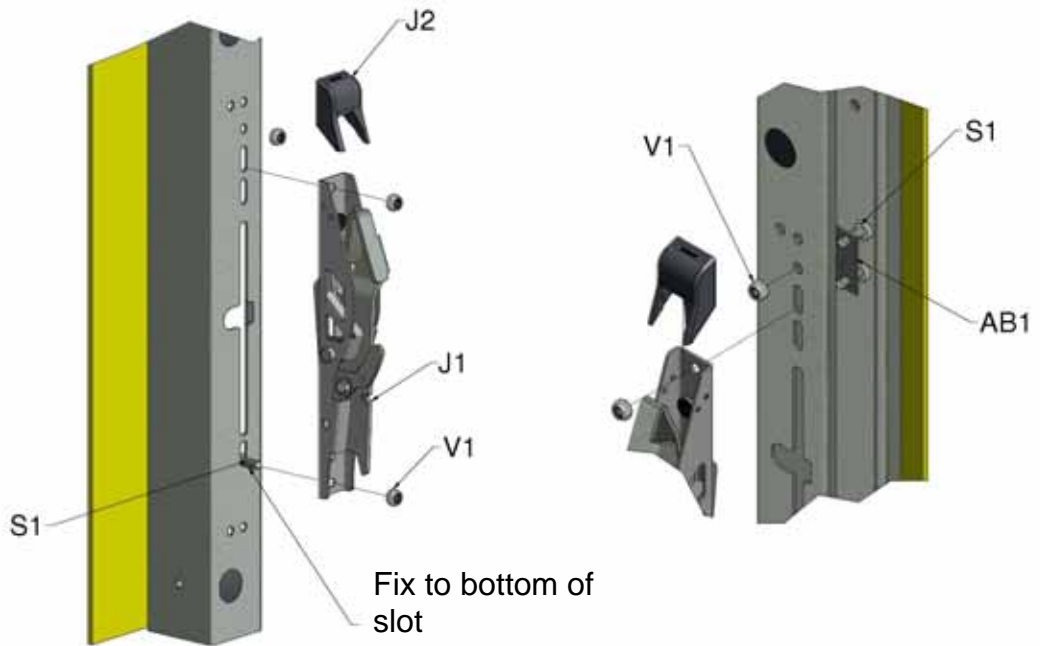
, Bolting of Locking Catches and Bolting Together Guide Rails
